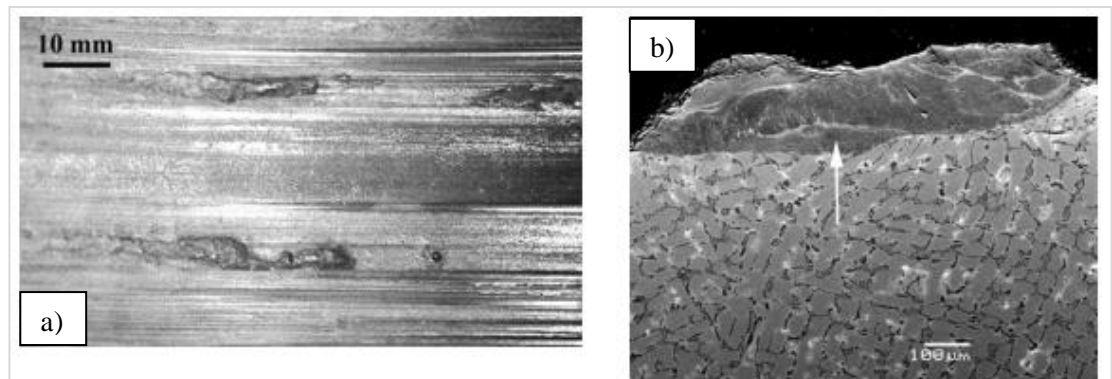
CoAl build-up on surface of tested Stellite 6 journal bearing components: a) optical surface view and b) cross section view [98].
